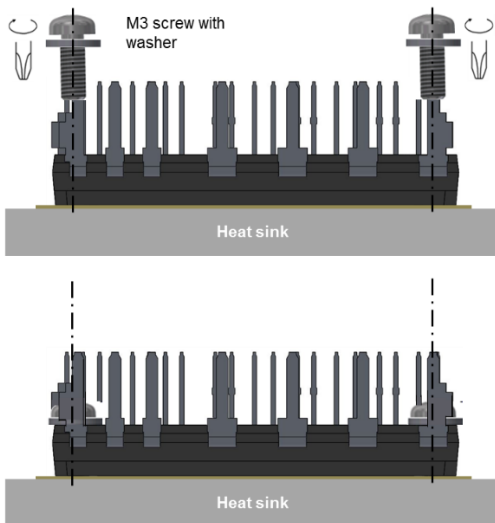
Process Flow of Soldering ASPM 27 Package (When Heat Sink Mounting First)
